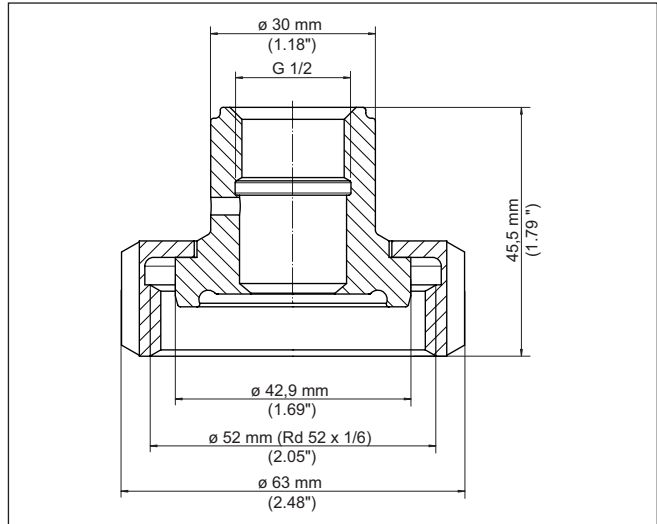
Dimensions hygienic adapter G $\frac{1}{2}$ (DIN 3852-X) on slotted nut DN 25 (DIN 11851-1) PN 40 - Cone seal
